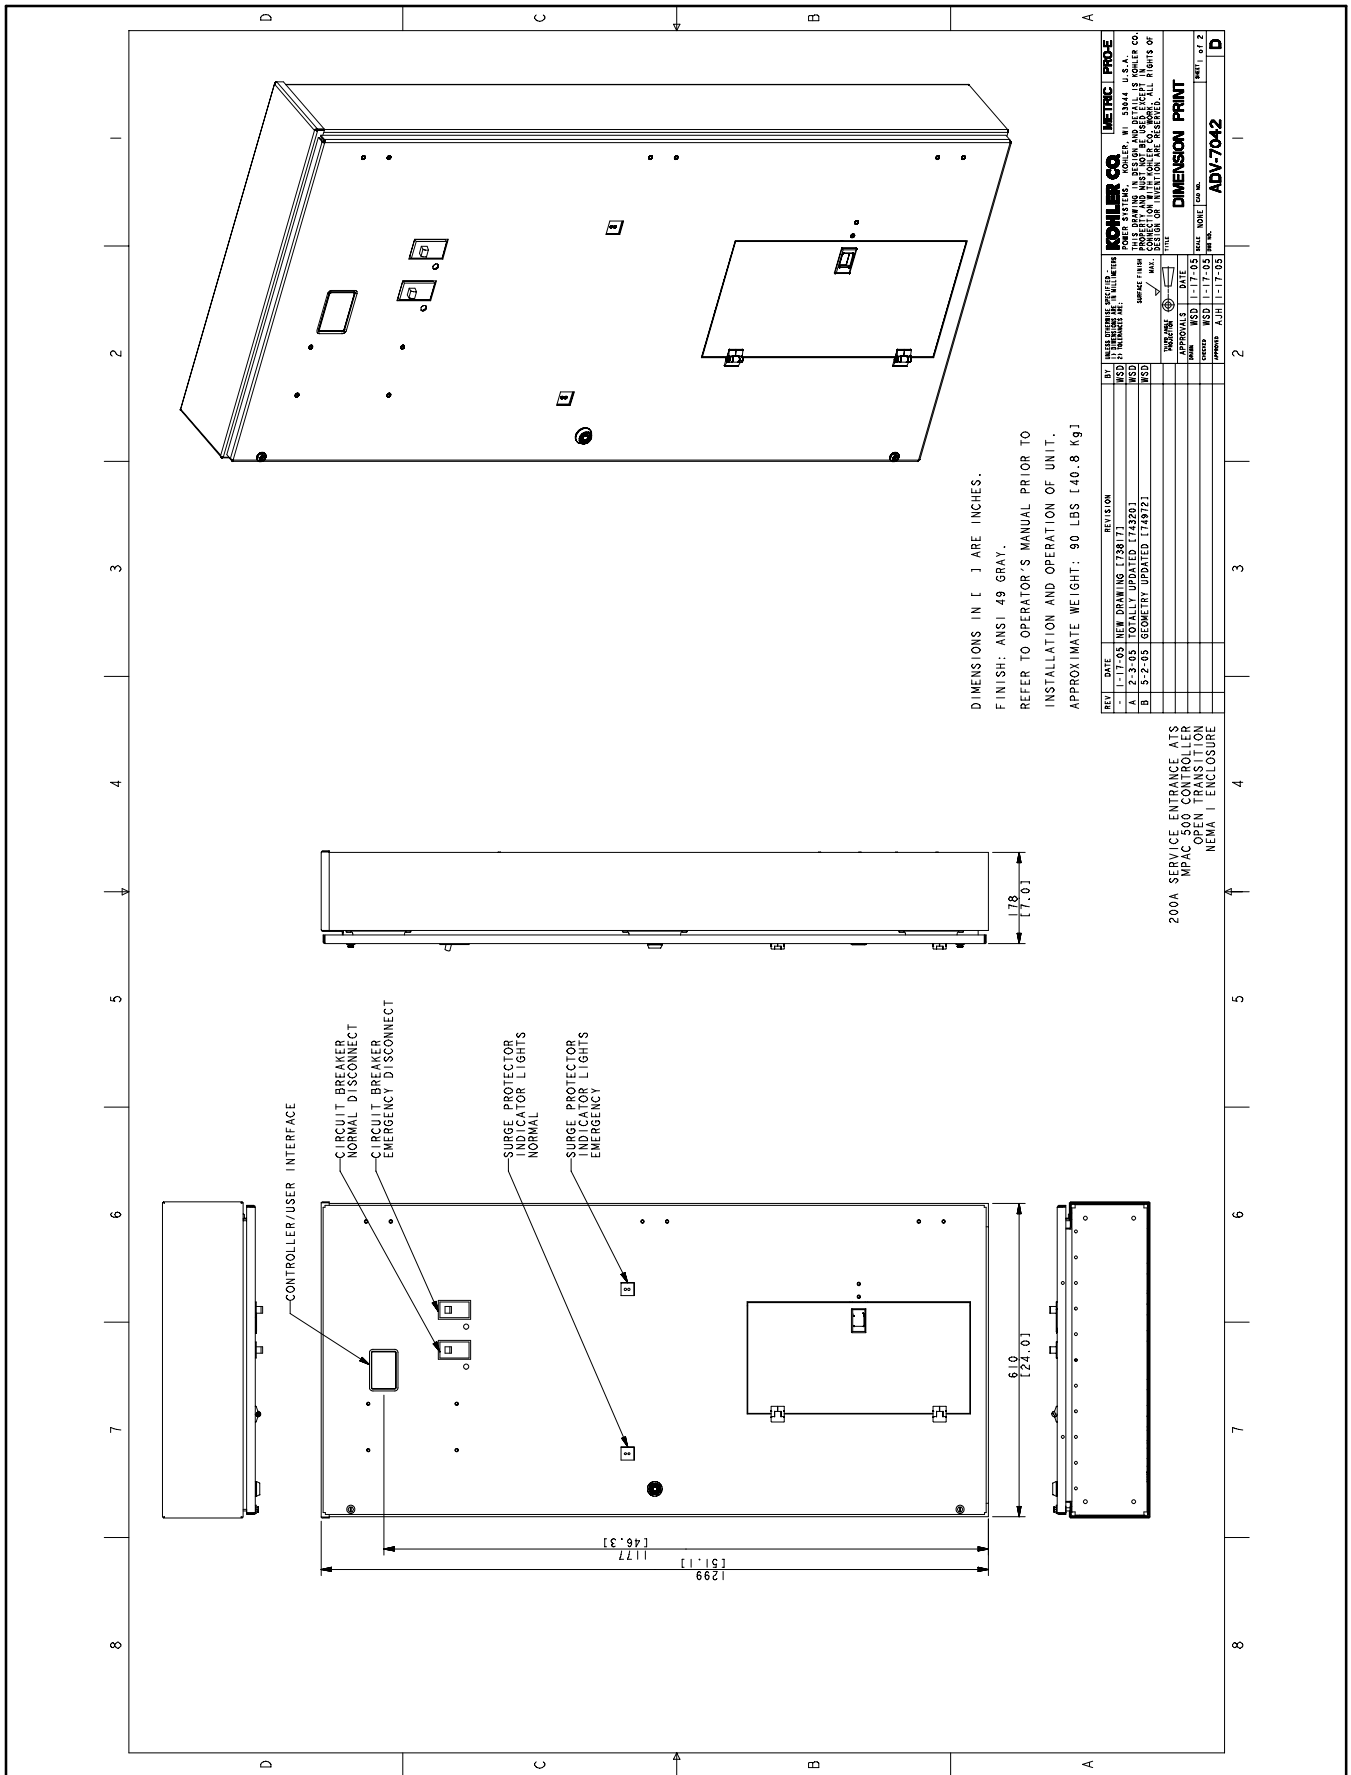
Dimension Drawing, Sheet 1, ADV-7042A-B
